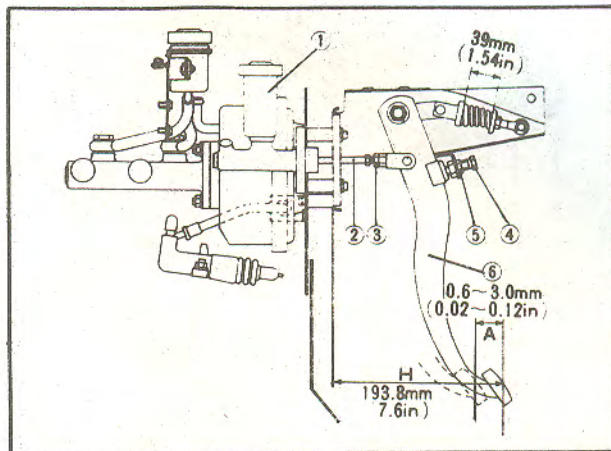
View of the clutch pedal with details of the clutch pedal adjustments.
